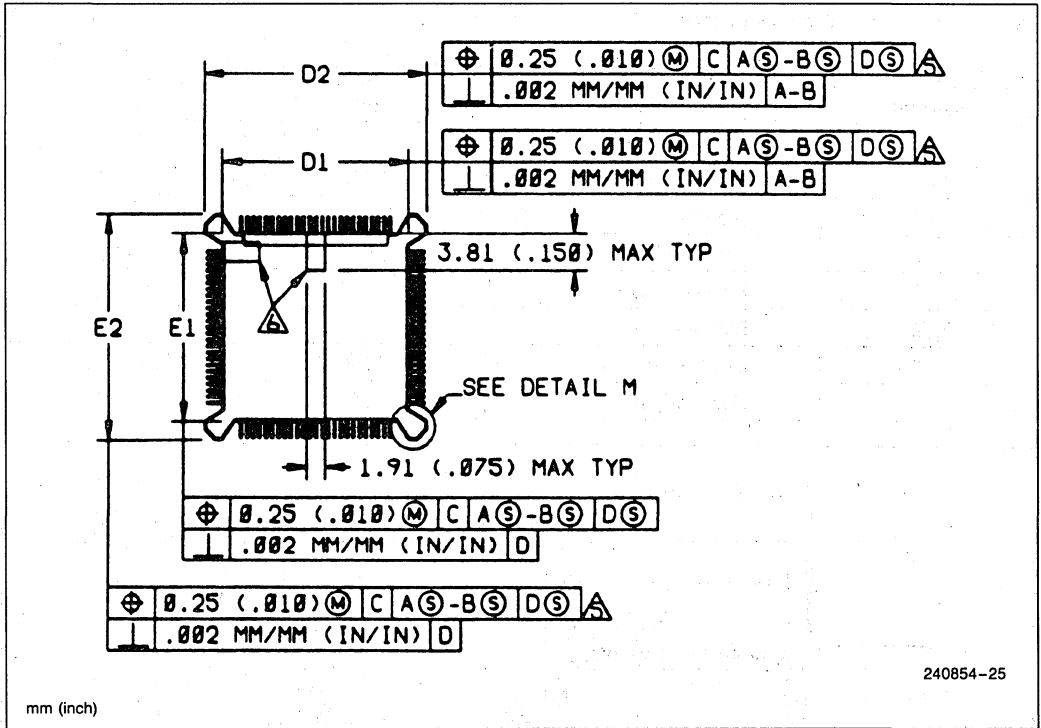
Detailed Dimensions of the 82750PB in the 132-Lead PQFP—Molding Details
